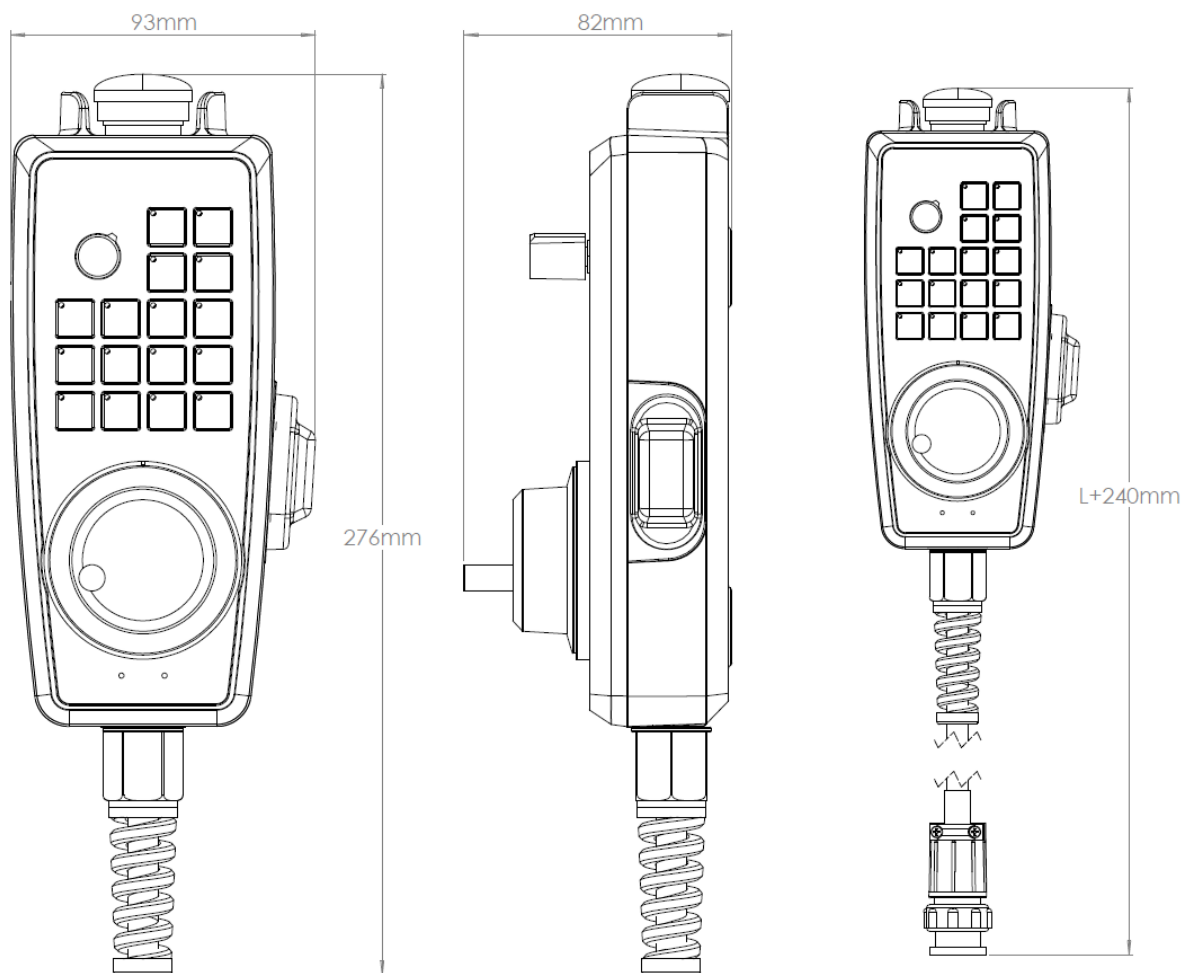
Remote Pendant Standard Dimensions (mm)
